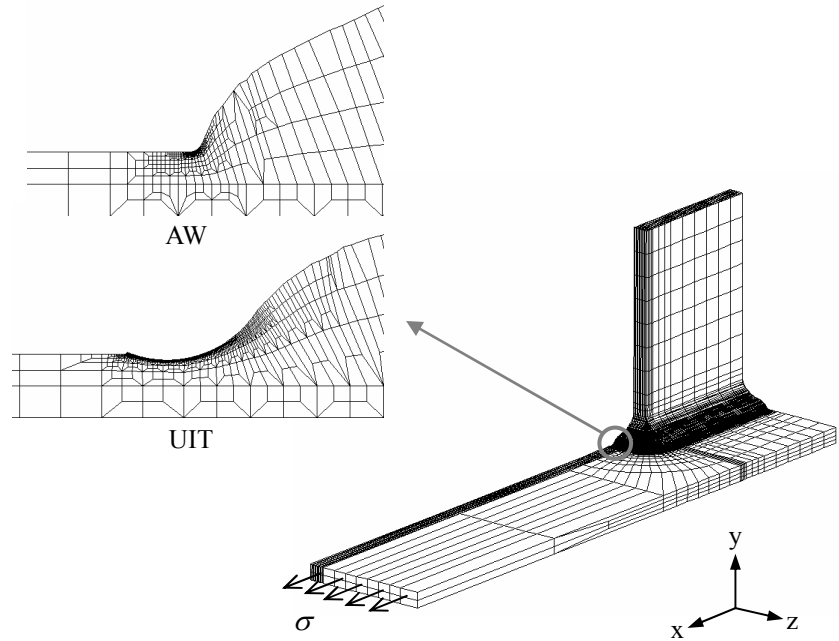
Typical FE models for AW specimen and UIT specimen.
